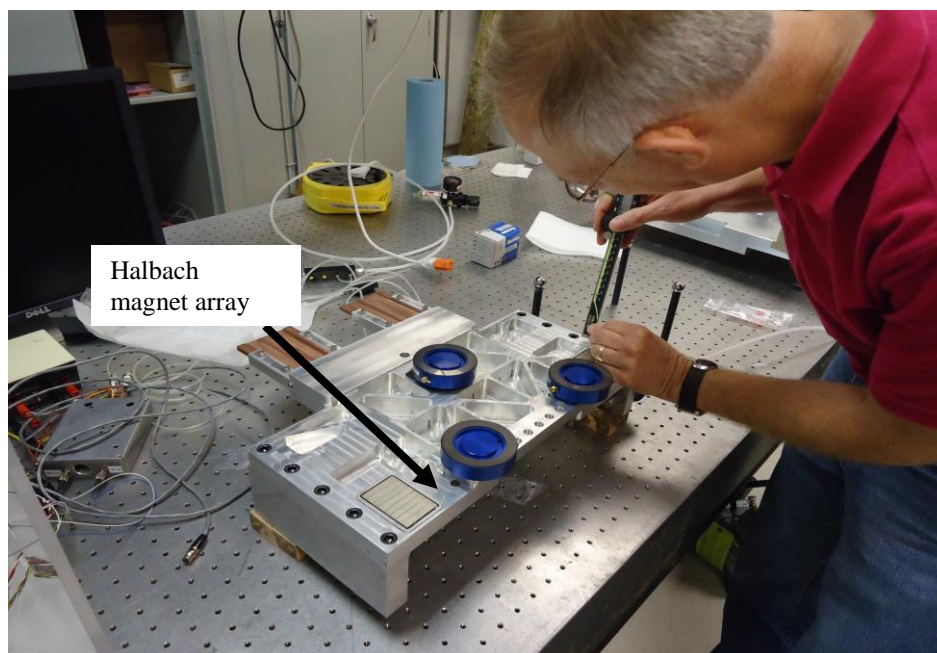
Dr. Jimmie Miller, of the Center for Precision Metrology at UNC Charlotte, checking the level of the Halbach magnet arrays after being assembled with the carriage.
